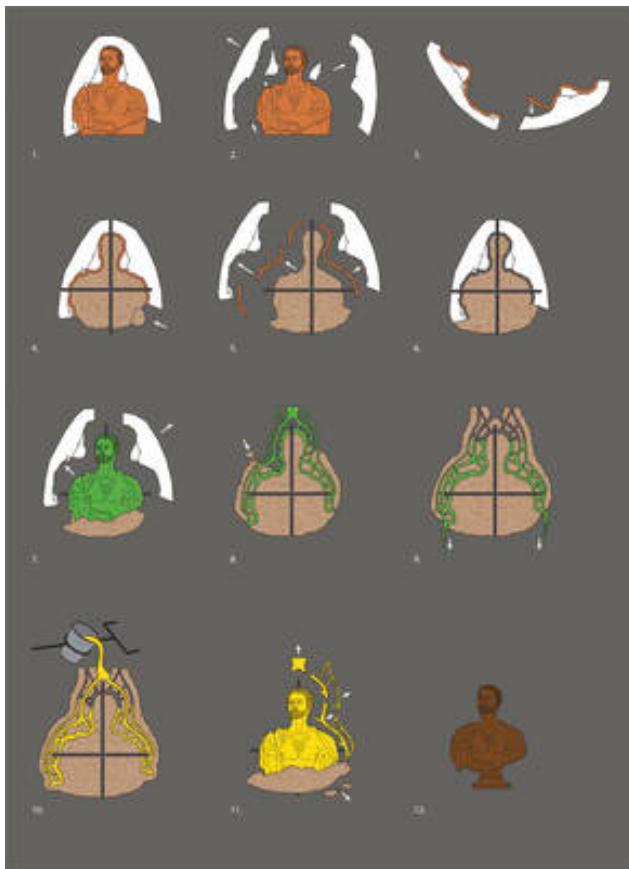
Diagram of a version of the lasagna technique. 1) a plaster piece mold is built up in sections around the clay model; 2) the reusable mold is disassembled; 3) sections of the mold are lined with sheets of clay that Cellini referred to as "lasagna" and that create the space to be filled eventually by bronze; 4) a fire-resistant clay core is built up around an iron armature to fit snugly into the lasagna-lined mold and dried; 5) the piece mold is disassembled in order to remove the lasagna; 6) the core is baked and reinforced by binding with wires; the fired core and plaster piece mold are assembled; and the armature and mold extension at the base help to preserve the space created by the lasagna; 7) molten wax poured into the space between the core and the piece mold creates the inter-model; when freed from the mold it is reworked to the artist's liking; 8) the sprue system is joined to the inter-model and invested with refractory mold material; 9) the mold is then heated until dry and all traces of wax are burned out; 10) molten bronze is poured into the baked mold until it is full; 11) when the metal has cooled, the refractory mold is broken away, the armature and core removed, and the sprue system cut off; 12) separately cast parts, such as a base, may be added at this stage, and the surface color may be enhanced by various means, including patination or gilding. Sketch based on Benvenuto Cellini (Italian 1500–1571), Bust of Bindo Altoviti, 1549, H. 85.2 cm (Isabella Stewart Gardner Museum inv. S26e21). See {Bewer and MacNamara 2012}.
